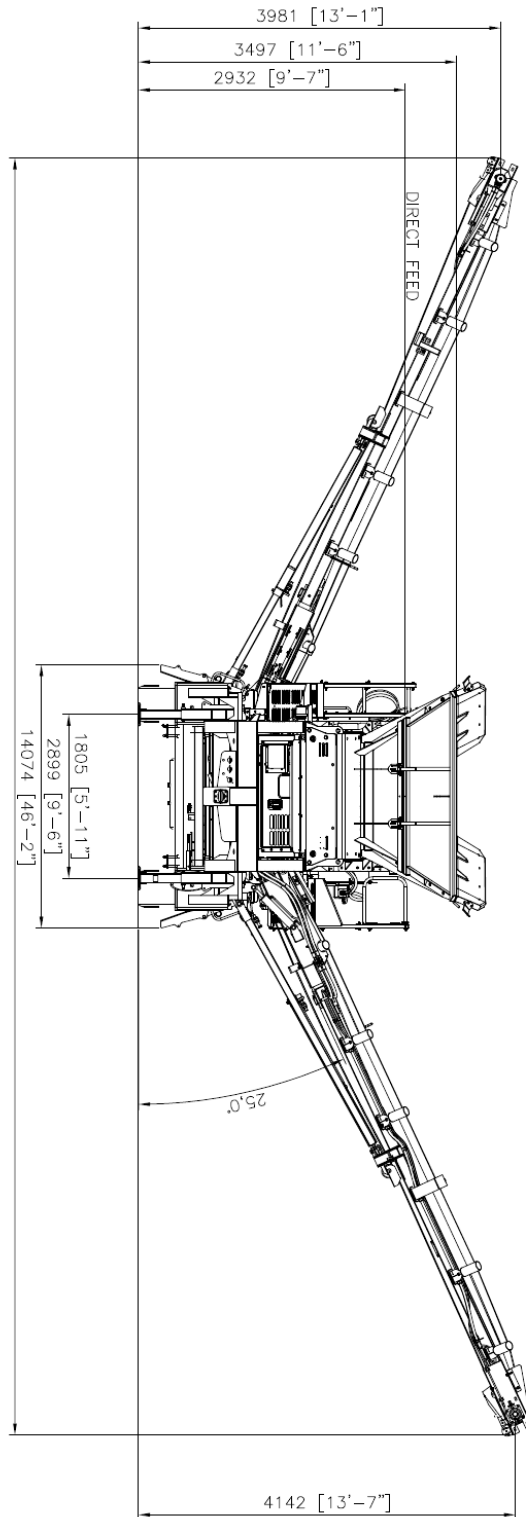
W800 WHEEL - WORKING POSITION (end view)
